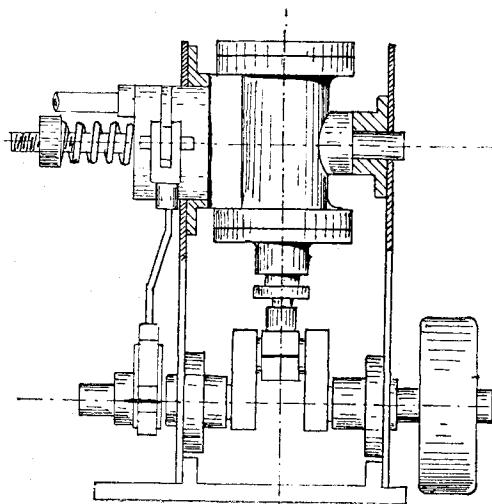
Section of an oscillating engine fitted with simple valve gear
